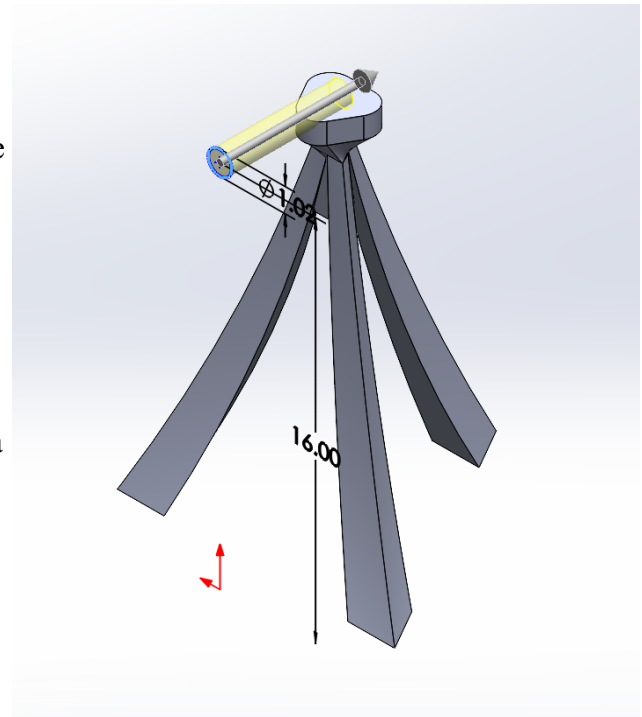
Preview of Extrude Cut in order to create cavity to house the motor
